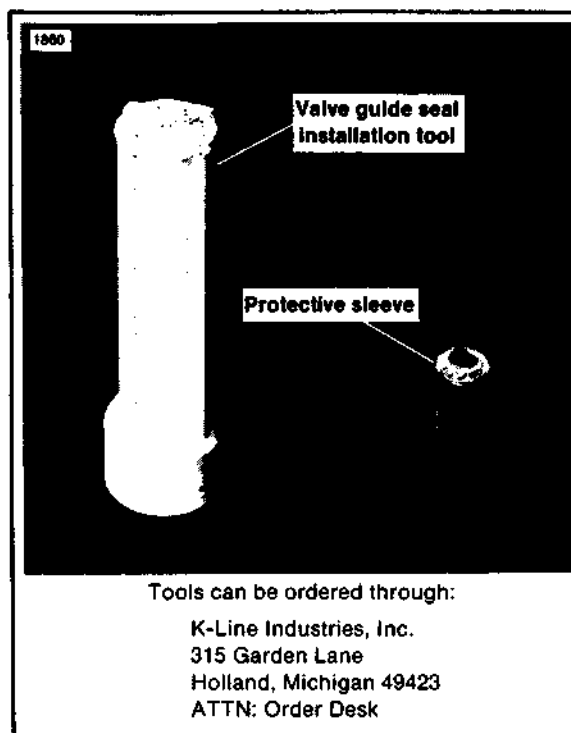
Valve Guide Seal Installation Tool and Protective Sleeve
